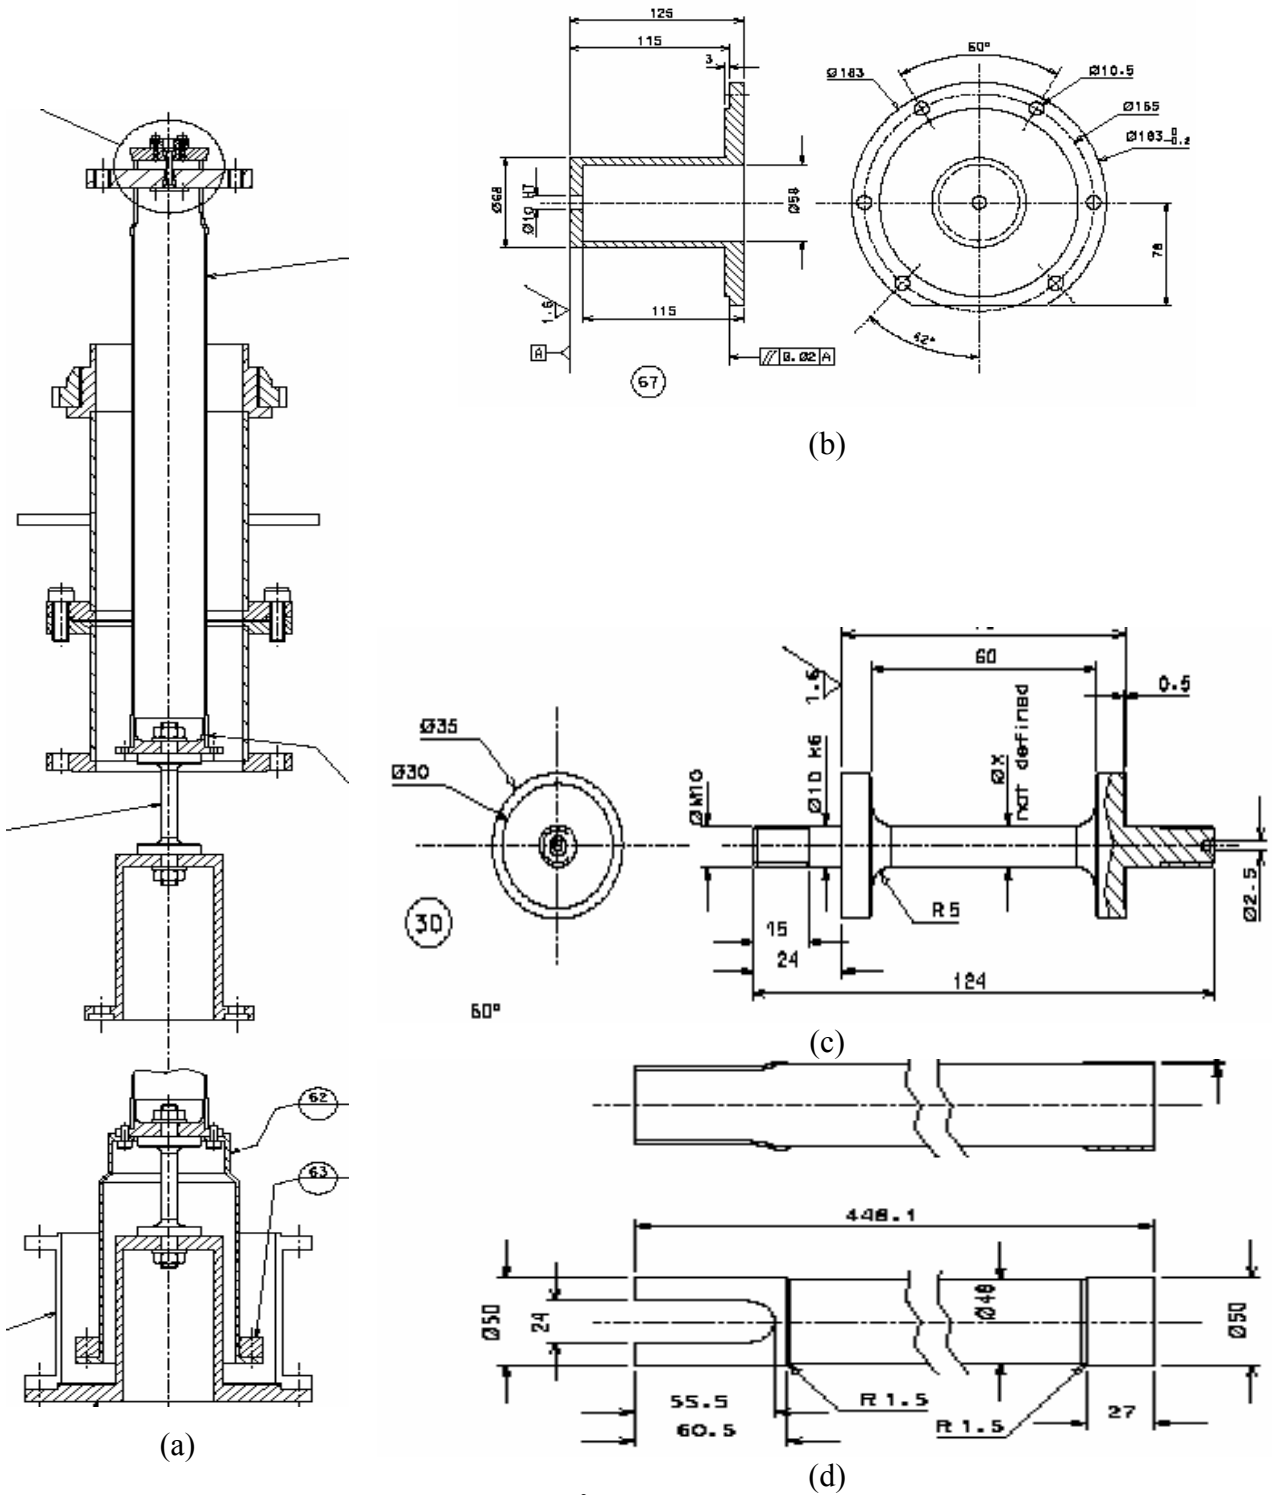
Drawings of the Inverted Pendulum²; (a) IP; (b) flex joint base; (c) small flex joint; (d) leg
